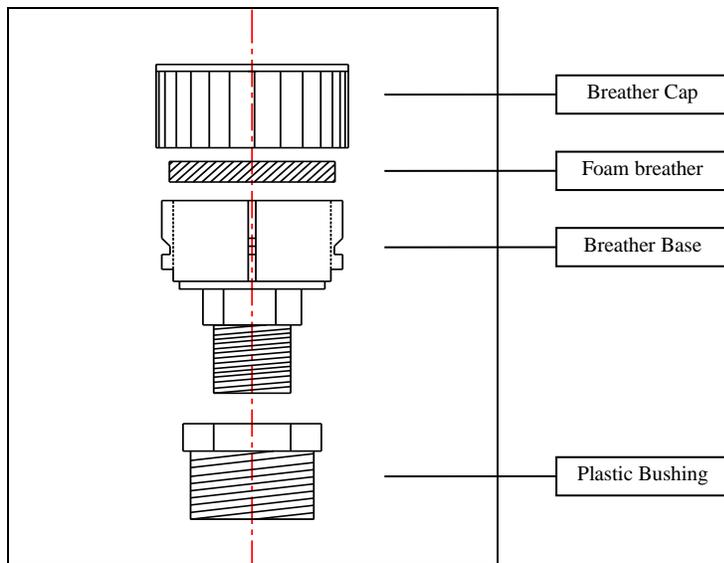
(Filter breather and Plastic Bushing - exploded view)
